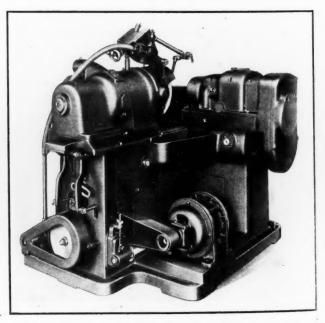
View showing Arrangement of the Grinding Wheel Slide, which is located at Right Angles to the Work-table
